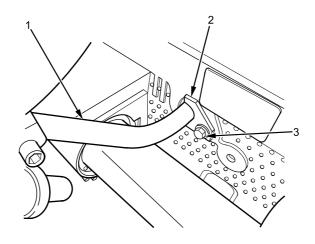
Turbocharger Lubricant Drain Tube Connection.
